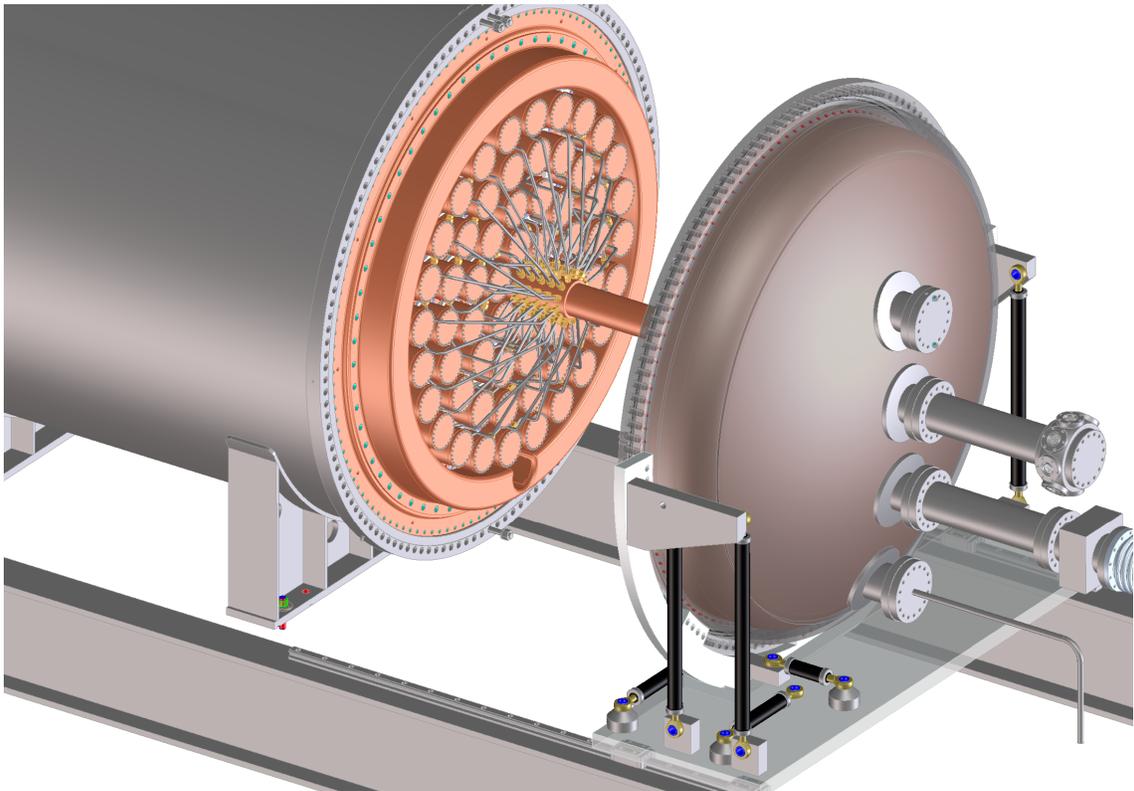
Hexapod Support Fixture, Attached to Torispheric Head
